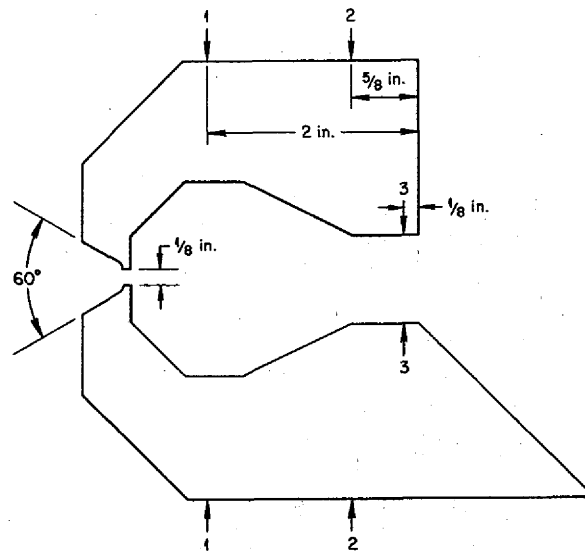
Details of Micrometer Measurements on Welded Primary NaK Pump Volute Weld Shrinkage Test Pieces. Measurements made at four radial sections (A through D) at 90-deg intervals at positions 1, 2, and 3 (see Table 3.4.1).
